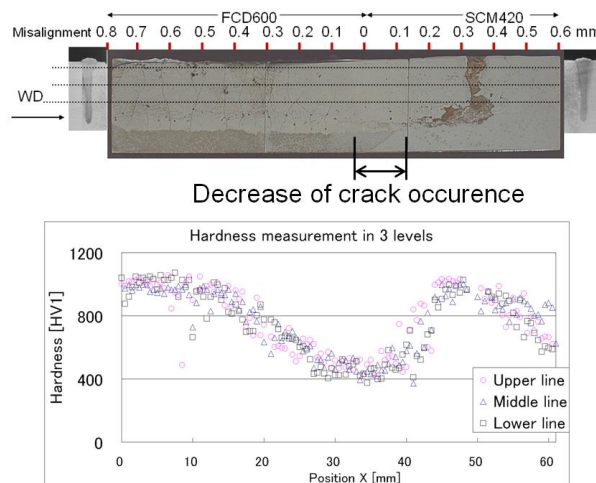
Longitudinal cut of misaligned weld, hardness measurement along longitudinal axis
